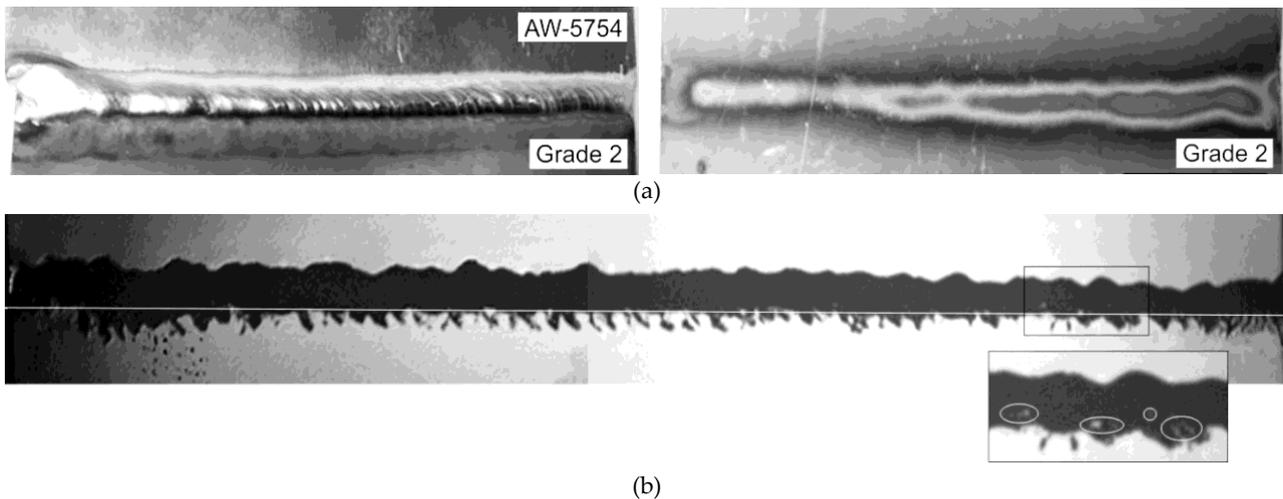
Braze welded joint Titanium Grade 2 + aluminum AW-5754, brazing consumable Al99.5 ϕ 3.2 mm: a) both sides of the joint; b) C-scan of the joint
